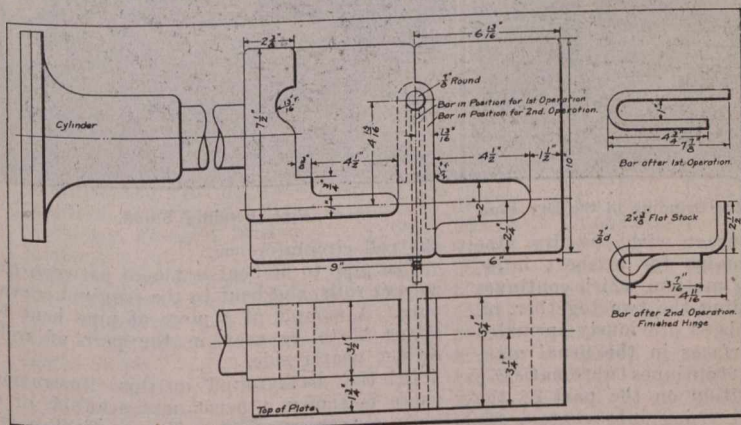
Hinge Forming Blocks for End Sill Aprons.
